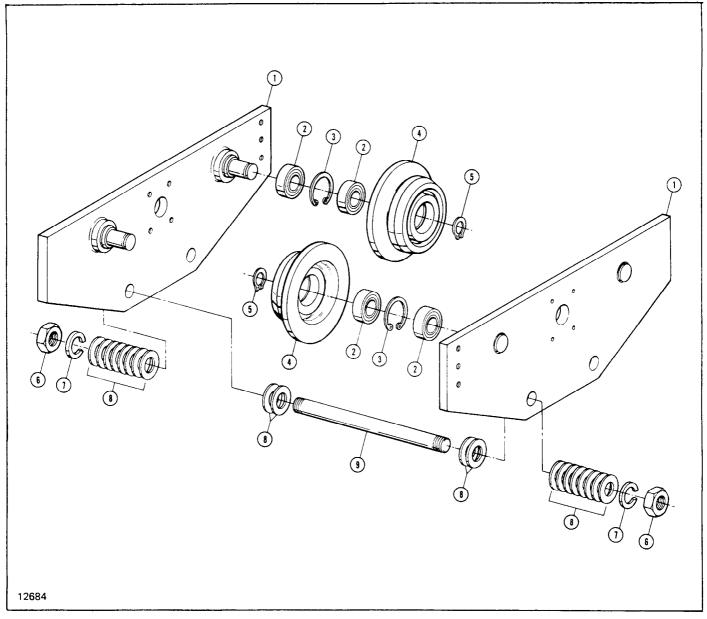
Push Type Rigid Mount Trolley Assembly — (6-1/2" & 8" ϕ Wheels) and Trailer Trolley* — (6-1/2" ϕ Wheels).
